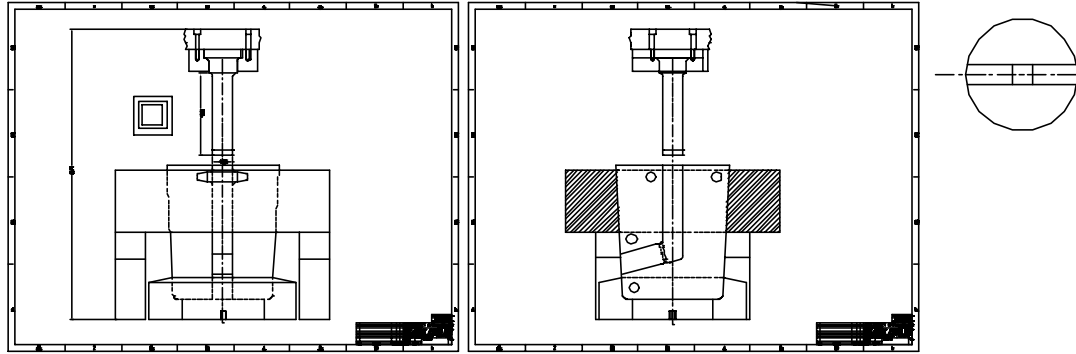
ECAE/P die for producing 100 mm x 100 mm cross section forging billets.
